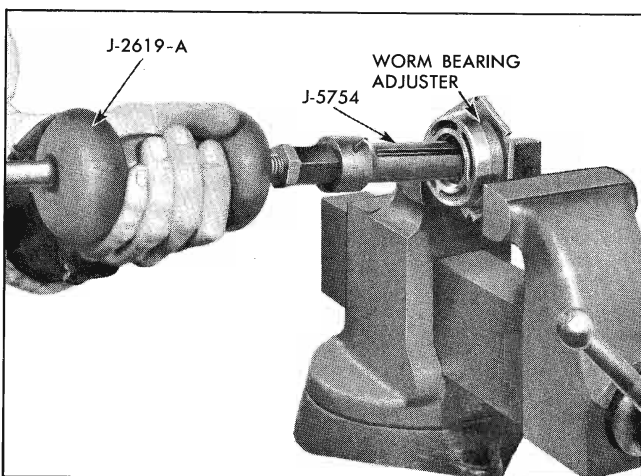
Removing Bearing Cup from Worm Bearing Adjuster
